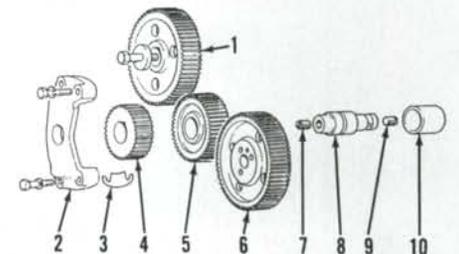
View showing timing gears and related parts used on four-cylinder engines.
